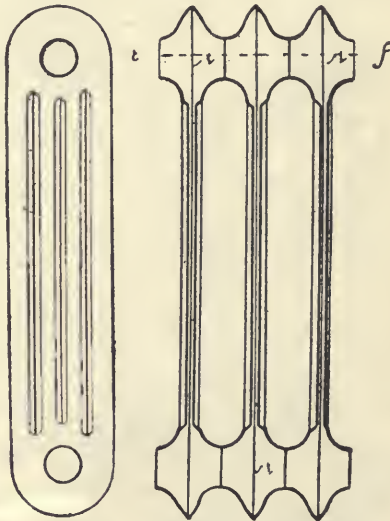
Radiator elements for central heating, made from plates of mild steel autogenously welded.
